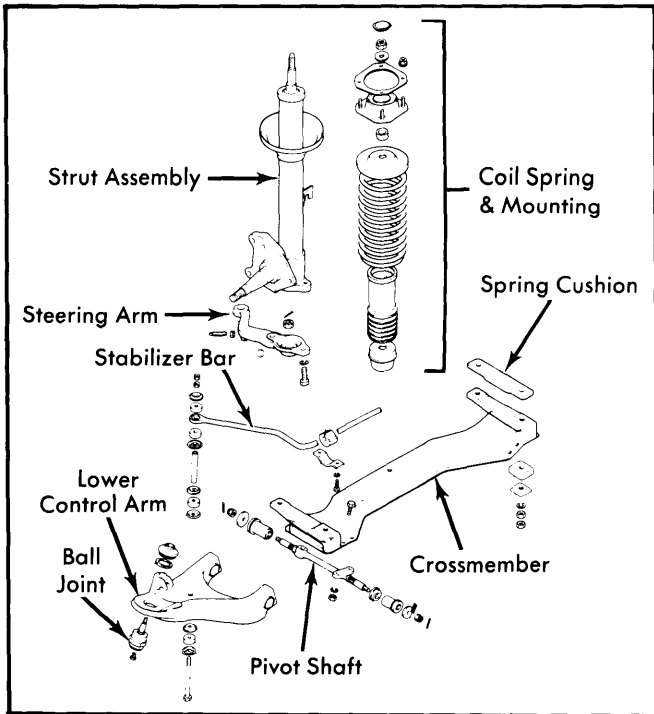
Exploded View of RX-4 and Cosmo Front Suspension
